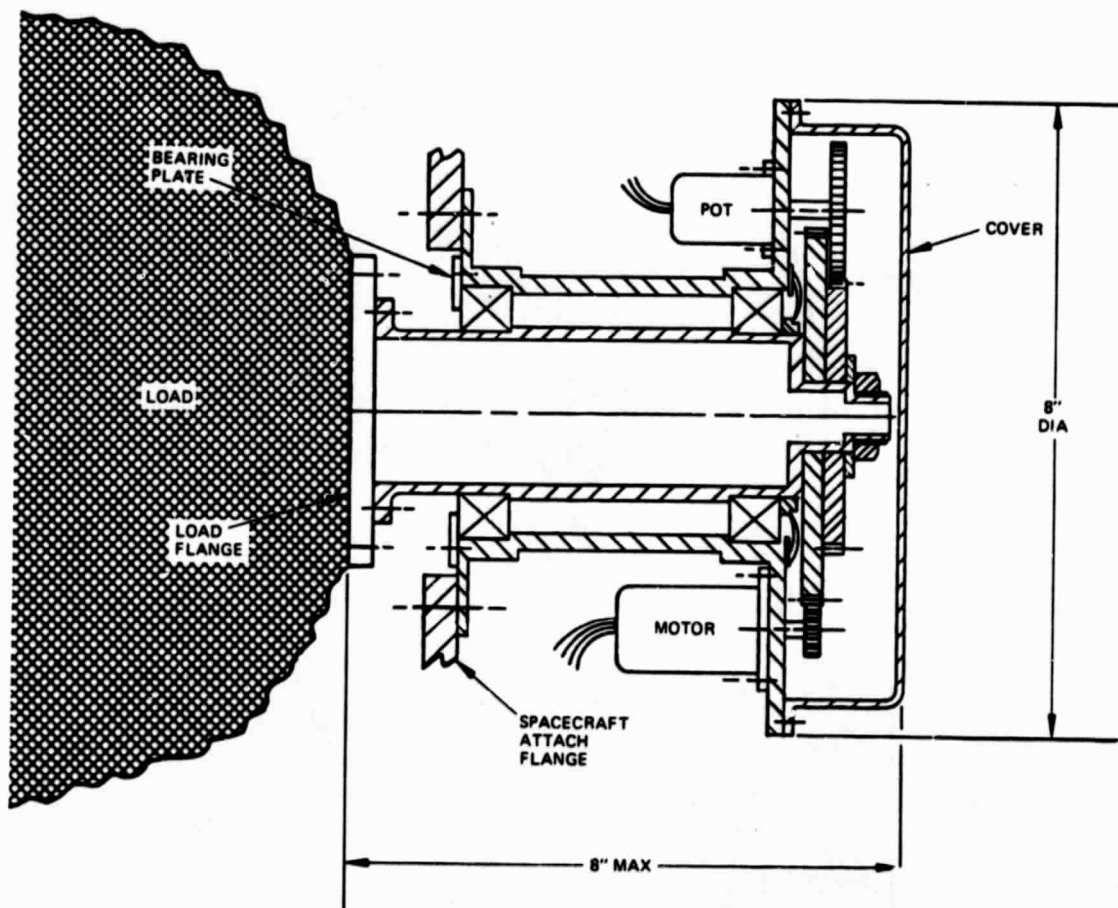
Millimeter wave experiment one-axis gimbal.
